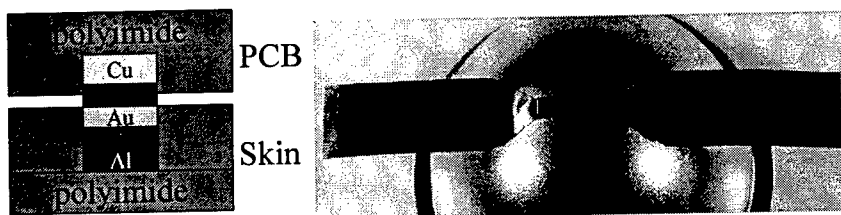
(left) Conceptual drawing of new packaging technology. (right) Picture of a shear stress sensor flexible skin packaged on a flexible PCB using all of the above mentioned technologies.
